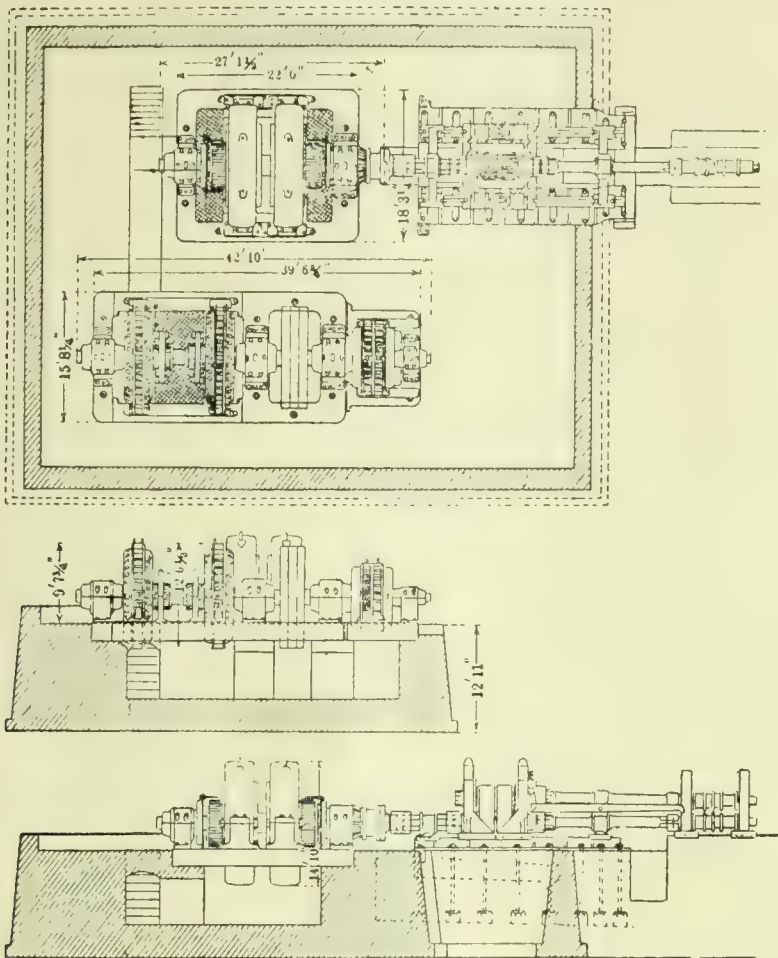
PLAN OF MOTOR-DRIVEN ROLLING MILL EQUIPMENT.
